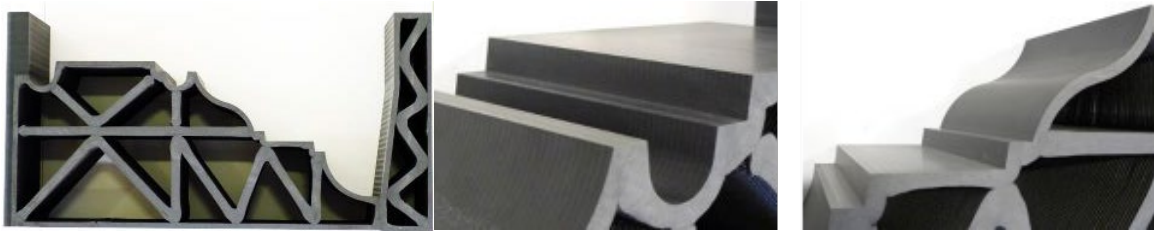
Prototype 12-inch deep cornice mold. Middle and right images illustrate the smooth surfaces, sharp angles, and tight radius that were achieved in the prototype mold.
